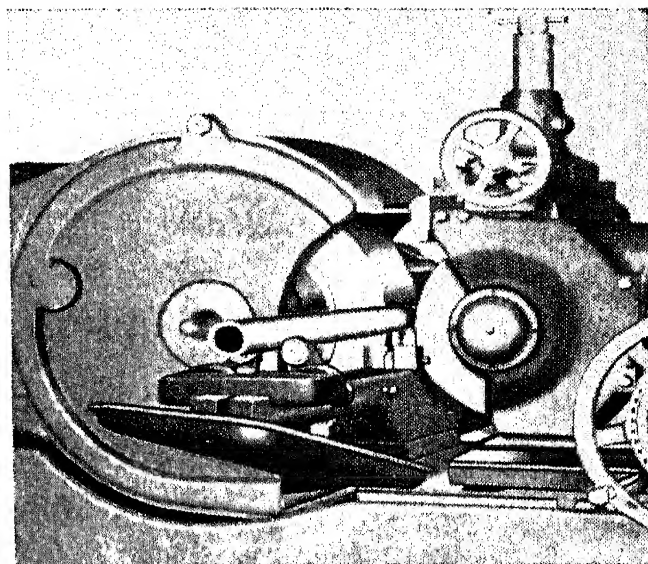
A roller infeed workrest with outboard support. (Courtesy Cincinnati Grinders, Inc.)
